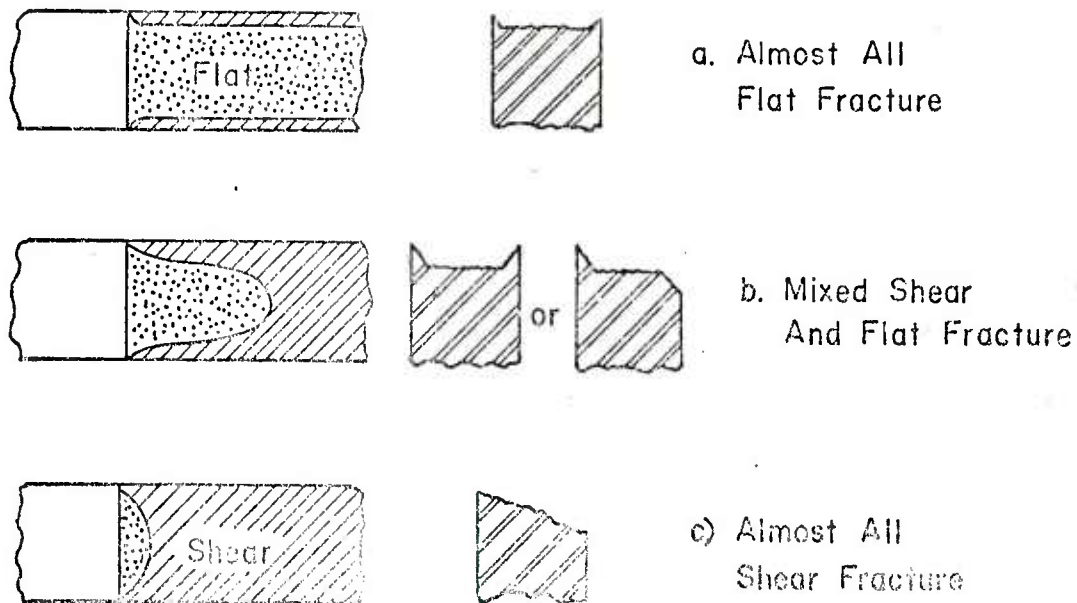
Appearance of Fracture Surfaces
